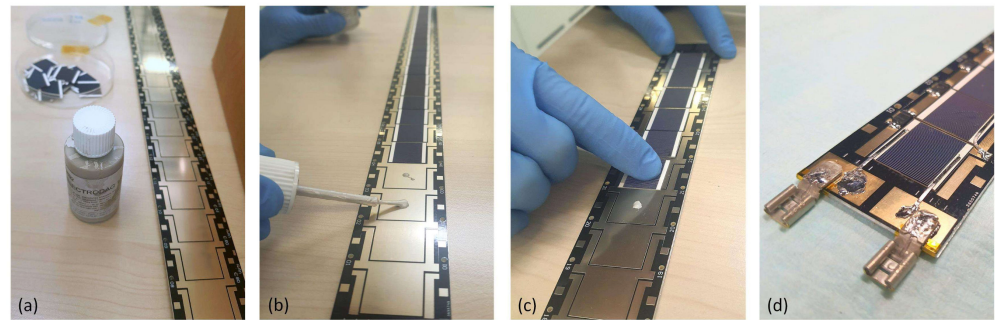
Connecting CPV cells with the commercial PCB. (a) initial parts and preparation stage (b) application of adhesive (c) placement of CPV cells (d) completed CPV circuit board assembly.
